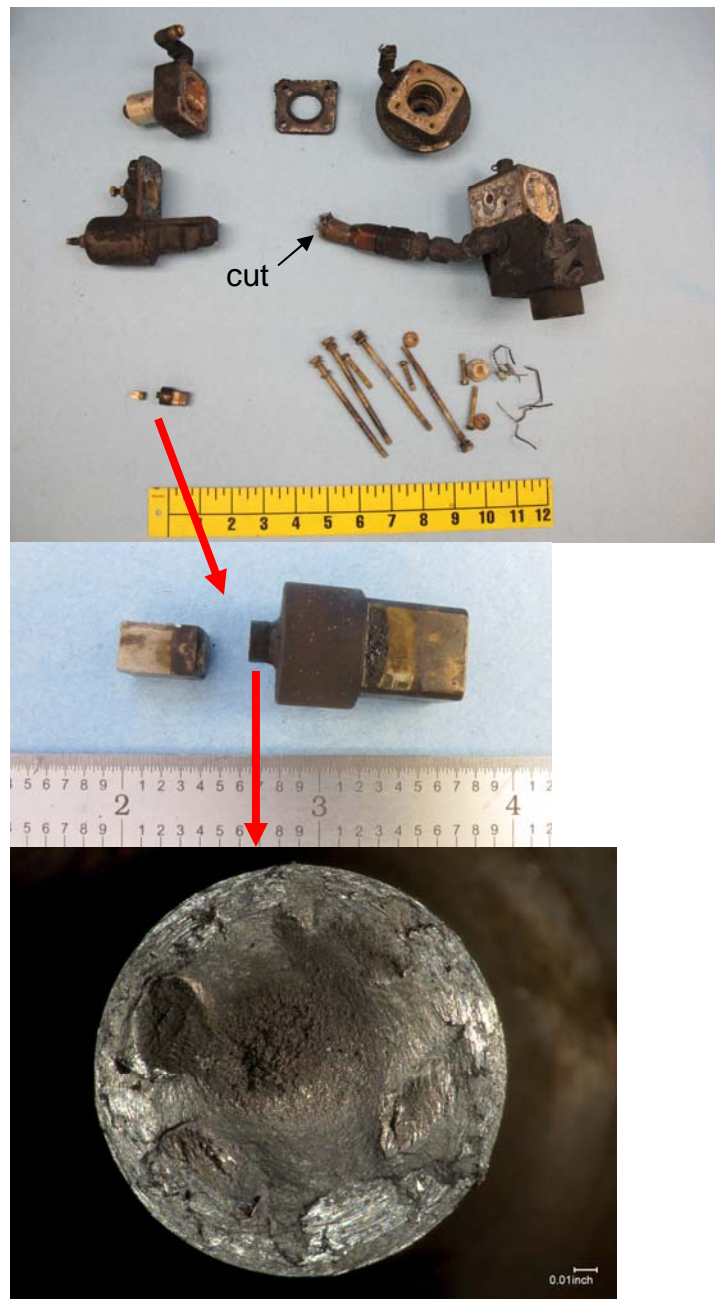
Overall view of the as-received pieces of the right engine-driven pump pieces and fractured drive coupling (above); close-up photograph of the fracture coupling (center); and fracture face of the drive coupling (bottom).
